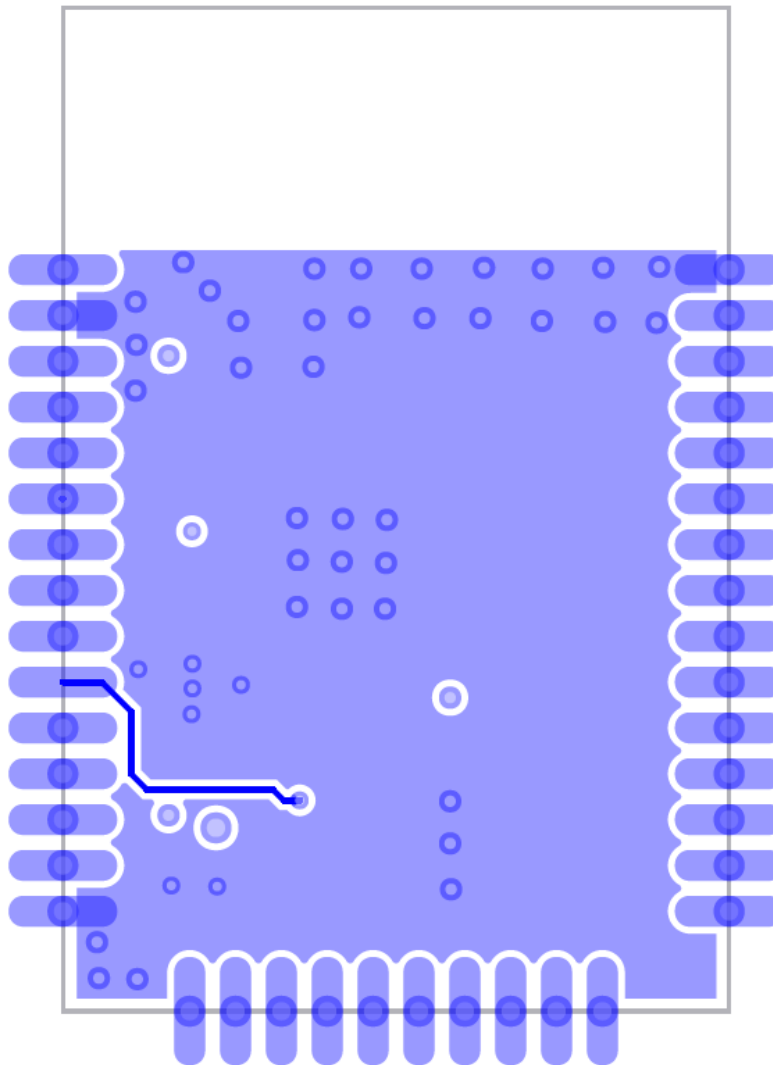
Bottom layer of the QN9080 PCB layout reference design
